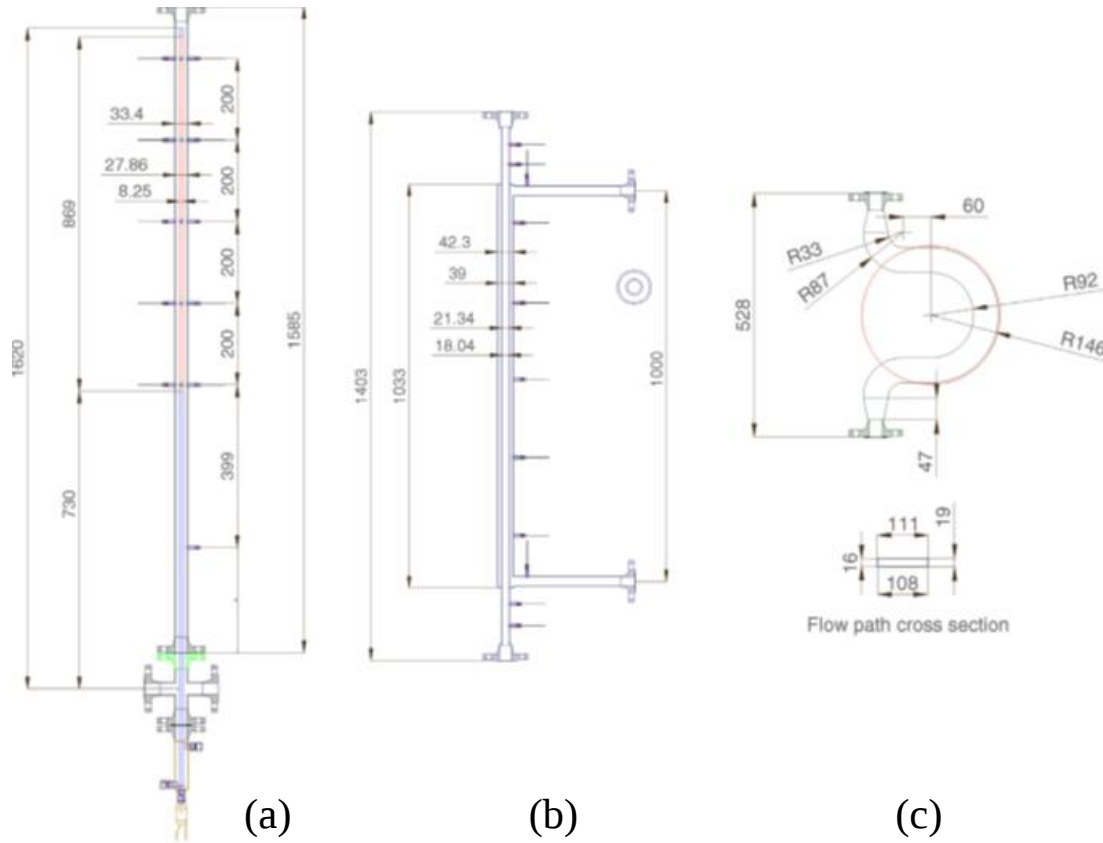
Design drawings of main loop components: main heater (a), heat exchanger (b), LBE pump (c) [141]
